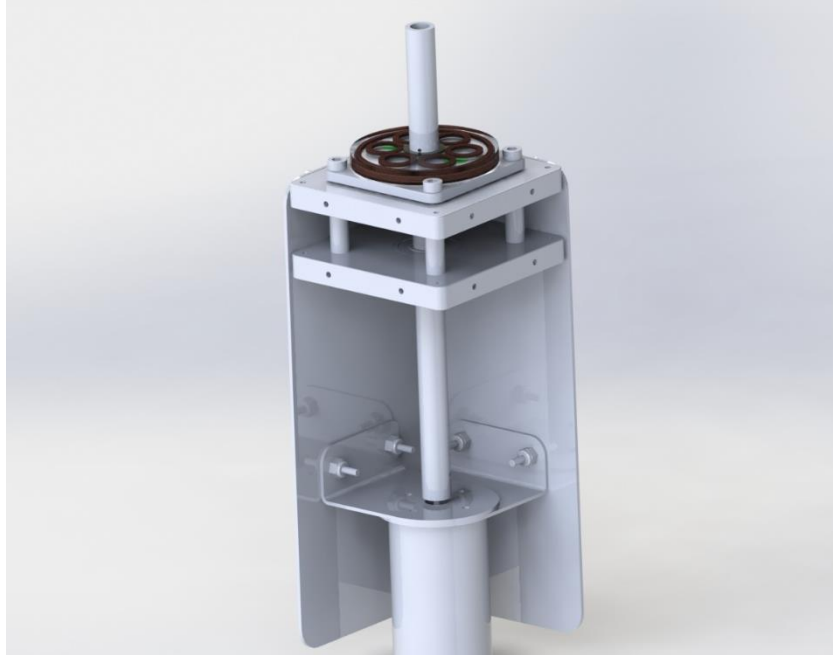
Generator & Transformer Mounted On Shaft Simulator.
